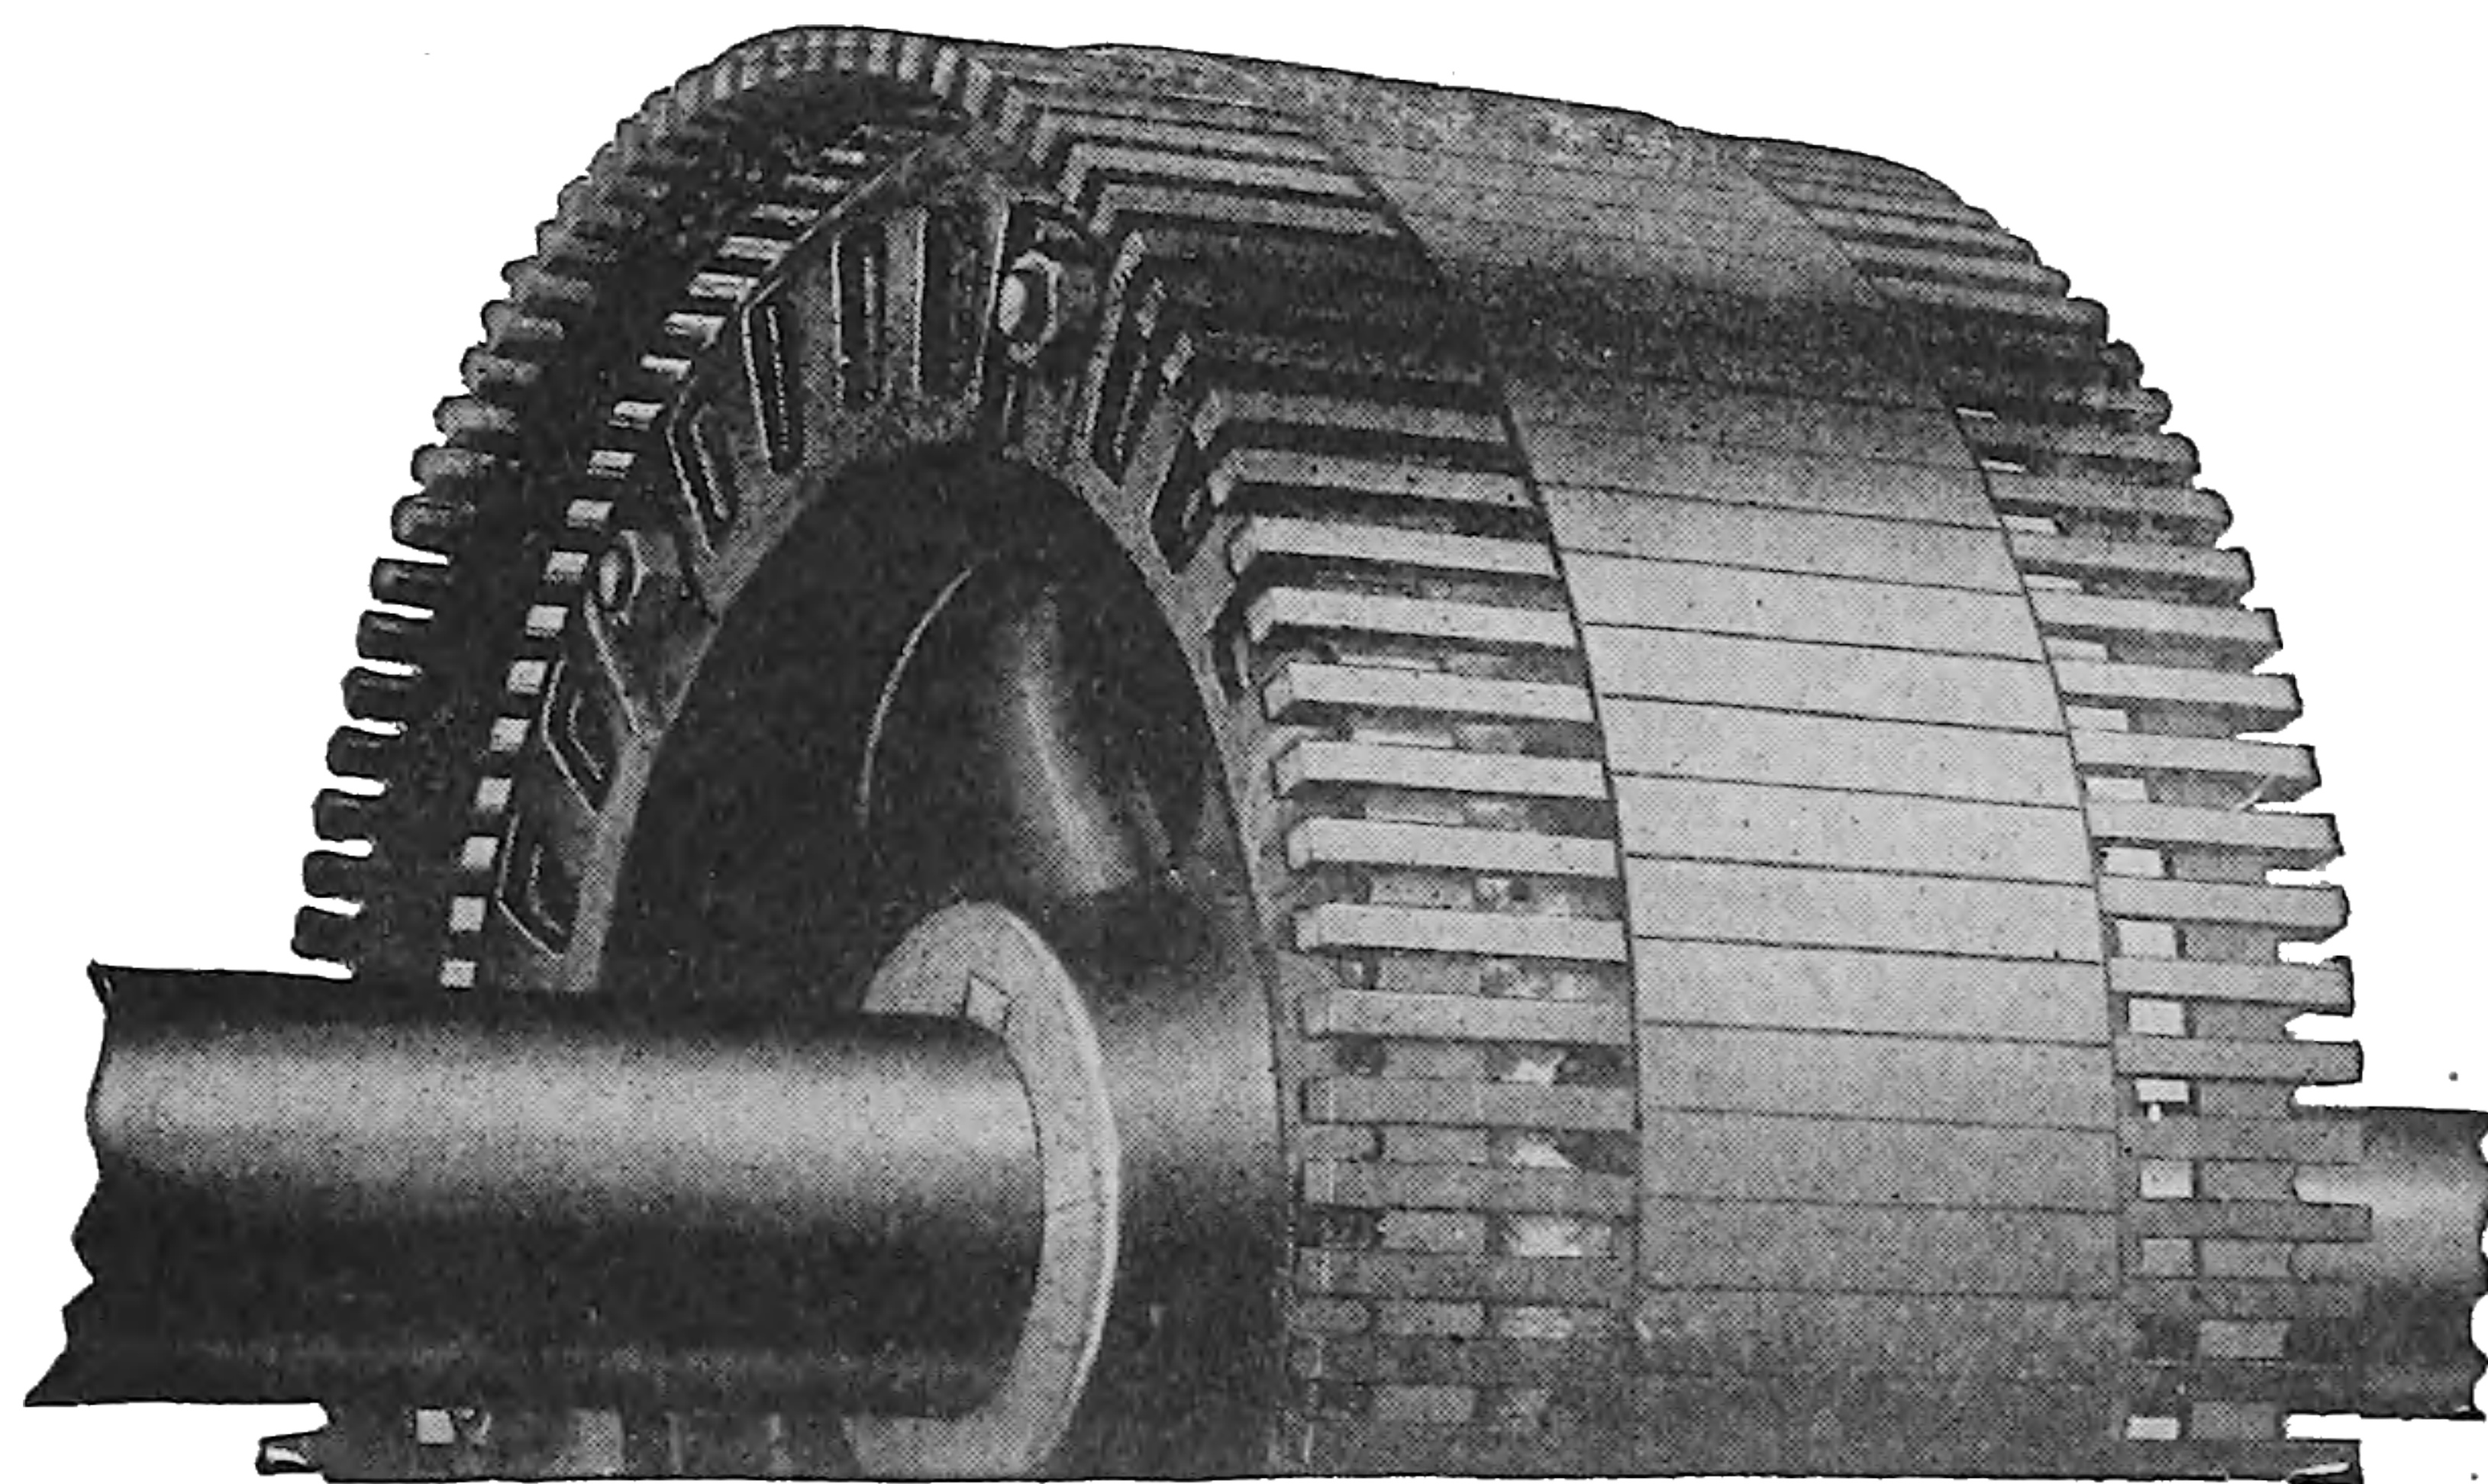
View of General Electric Form K Rotor Showing Welded Type of End-Ring Construction
